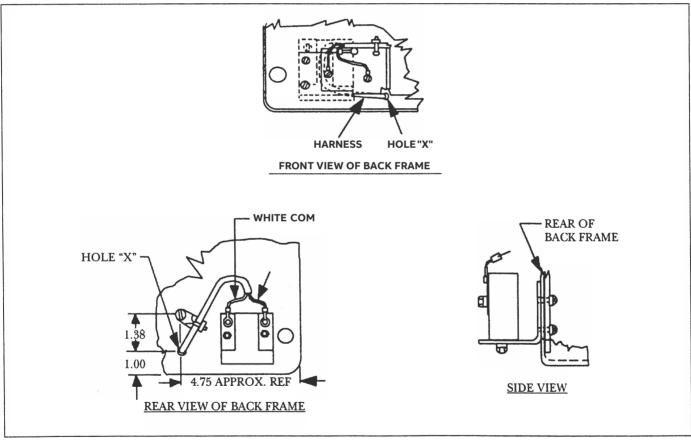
Mounting Detail for Secondary Disconnect Block for 4th Wrre Neutral Sensor (Draw Out Breakers Only)
